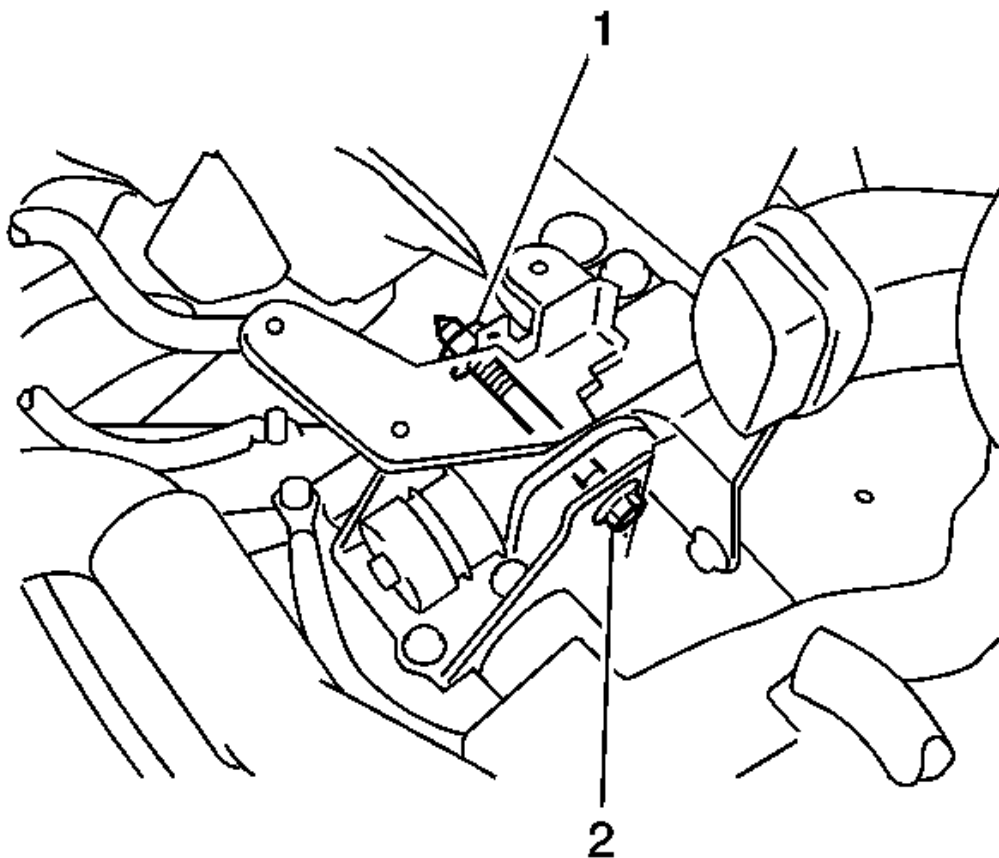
Identifying Left Side Engine Mounting Insulator Through Bolt & Nut
